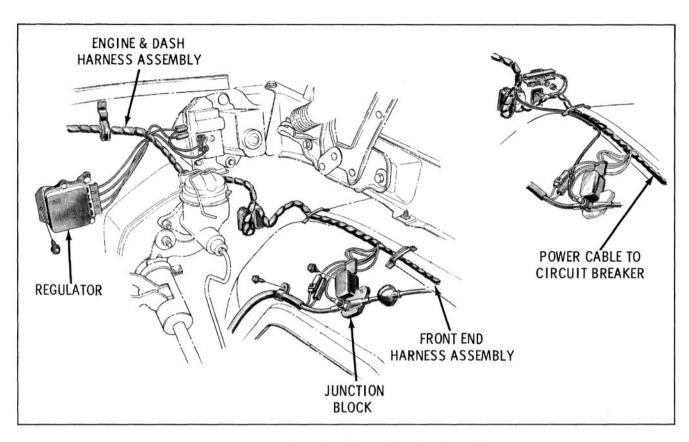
Regulator Installation (30-31 & 32 Series)
